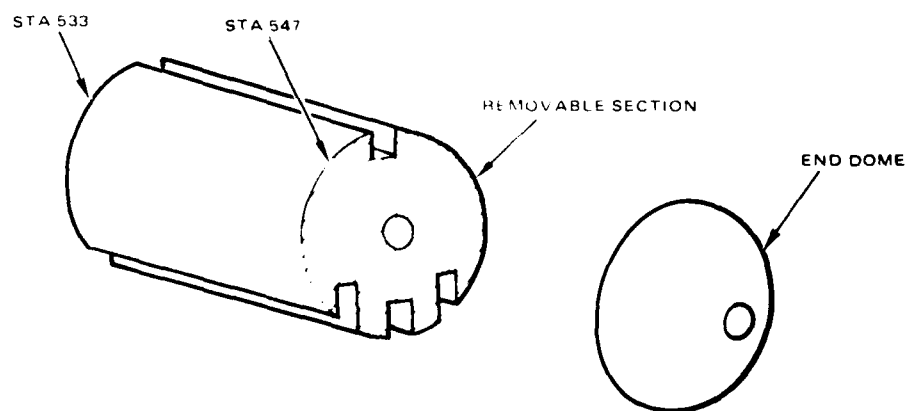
Tailboom Mandrel - Removable Sections (Toolproofing)
